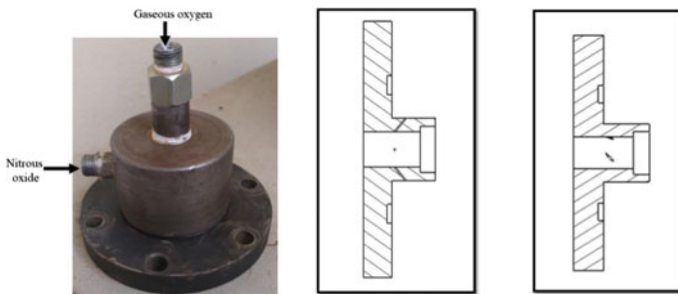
a) Injector assembly, cross sectional view of b) radial injector, and c) swirl injectors
